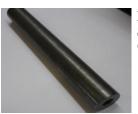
Swivel Shaft 1 ¼ X 9.5 " Qty: 2 per GF2
